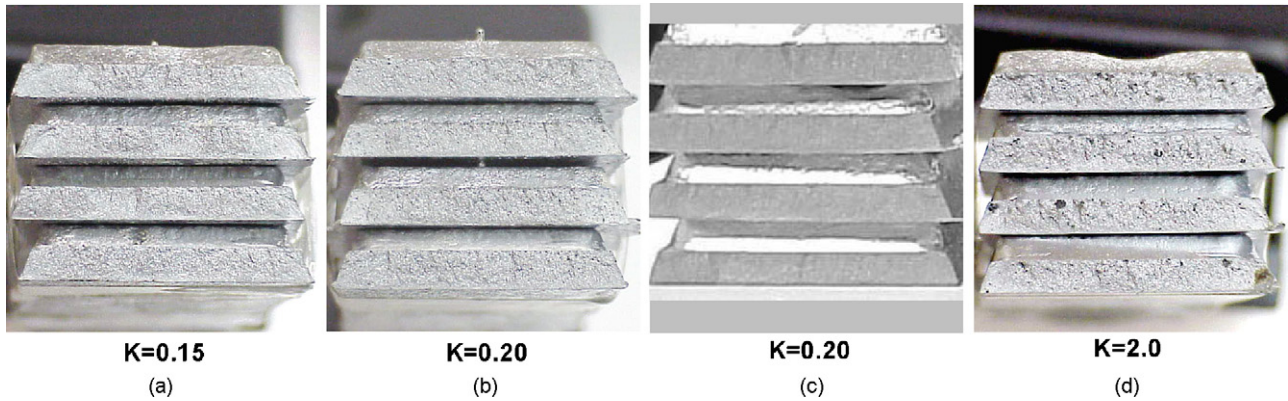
Fractured surfaces and K -value of: (a) the Virgin, (b) Type I Scrap, (c) Die Casting and (d) the Concentrated Scrap.
